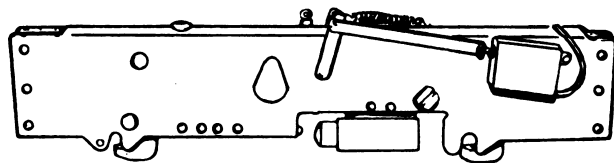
In-flight operable bomb rack lock (IFOBRL).
